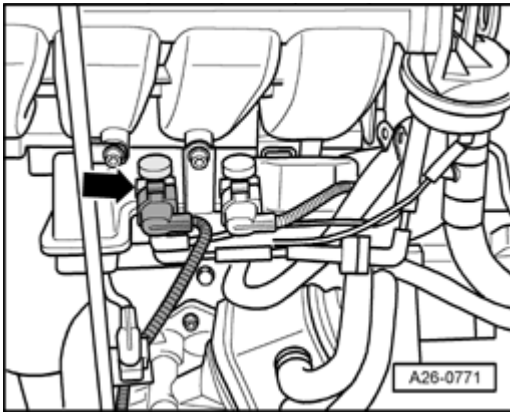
Disconnecting Electrical Connector At Secondary Air Injection (AIR) Solenoid Valve -N112-
